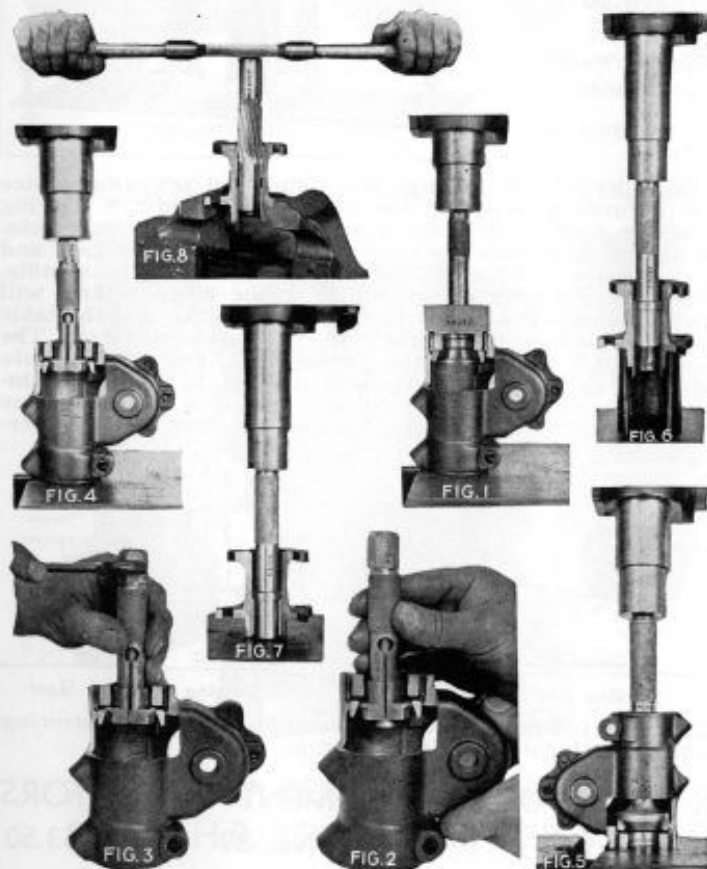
Driver A403C used with Arbor press or light sledge to start roller bearing cone. FIG. 2—Driver A403A must be slightly compressed to get it into position. FIG. 3—Driver A403A in position being expanded to grip the roller bearing race. FIG. 4—Driver A403A pressing the roller bearing race out. FIG. 5—Driver A403B pressing a new race into position. FIG. 6—Driver A403E pressing out both bronze bushings from the steering worm housing cover, at one operation. FIG. 7—Driver A403E used to press new bushings in place. When end of driver hits Arbor press bed plate, then first bushing is Okey. Top bushing is pressed in flush. FIG. 8—Reamer A403D reaming both steering worm housing bushings. Pilot insures perfect alignment.
